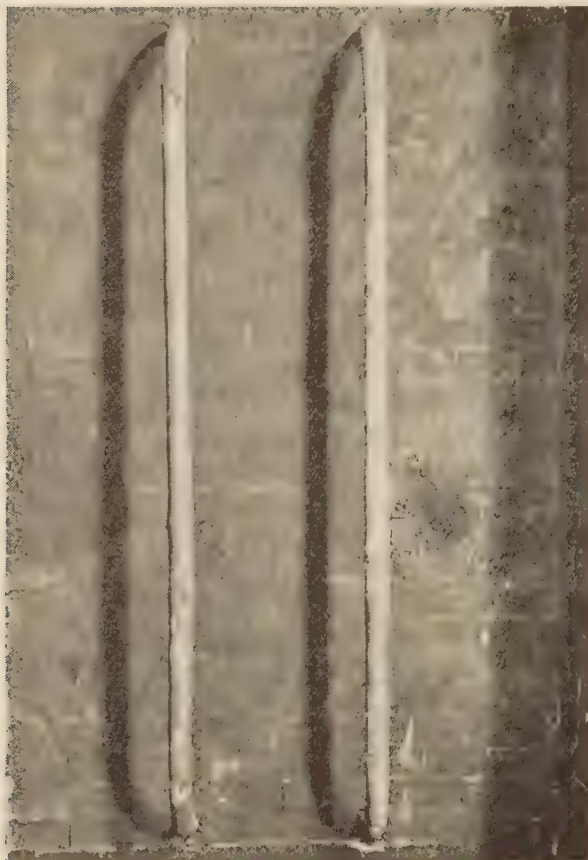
SHOWING BOILER TUBES AFTER 60-DAY RUN
